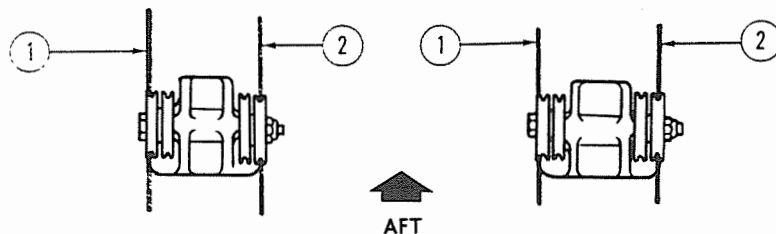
(Sheet 2 of 7 Sheets). Fuel Tank Selector Valve Control System – Control Pedestal and Center Wing Tank Valve
